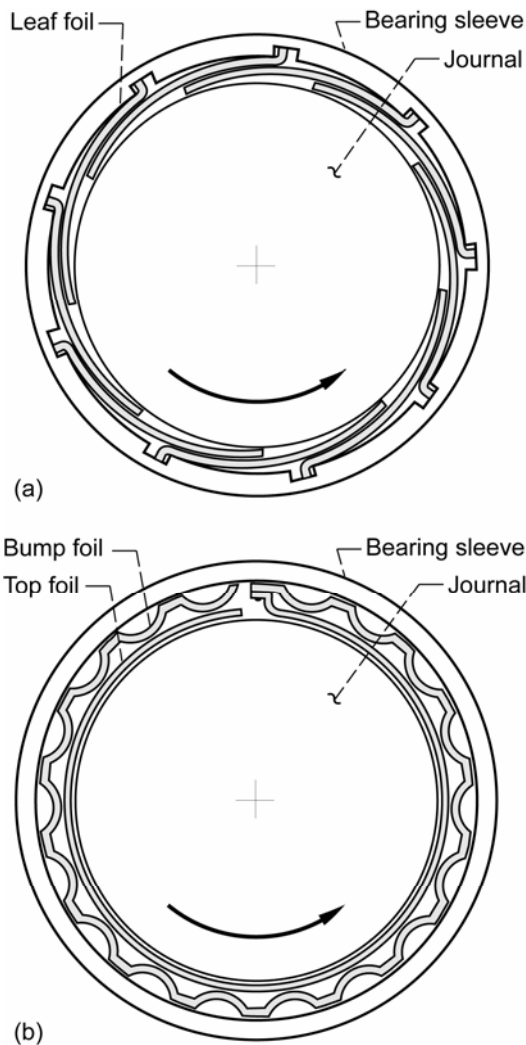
Schematic example of typical foil bearings with axially and circumferentially uniform elastic support elements. (a) Leaf-type foil bearing. (b) Bump-type foil bearing.
